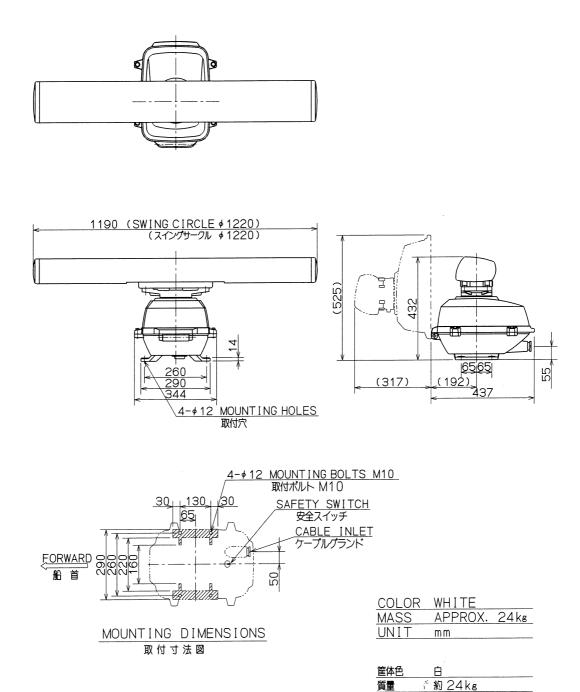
OUTLINE DRAWING OF SCANNER UNIT NKE-250
